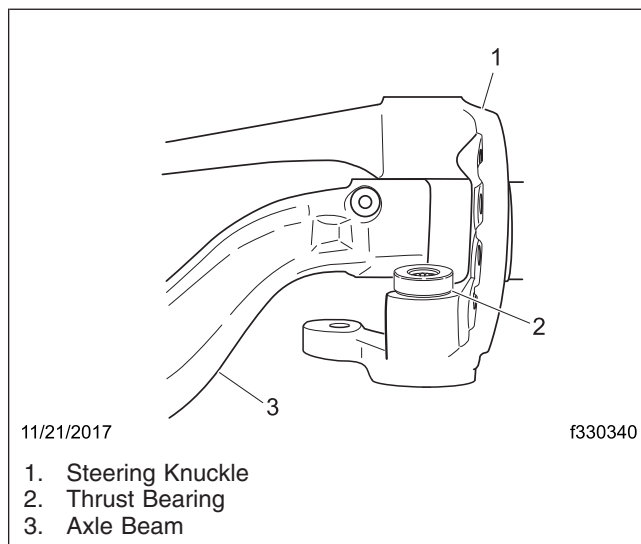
, Thrust Bearing with Seal Lip Installed Towards the Bottom of the Knuckles
